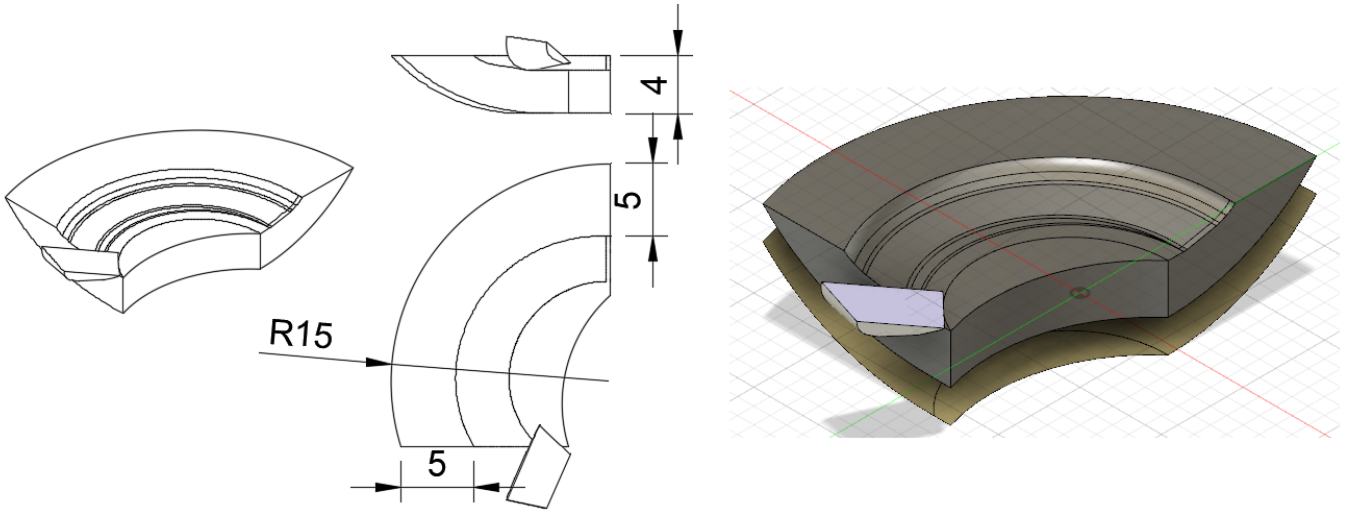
Final tool, workpiece and fixturing assembly for the “High Feed” case
